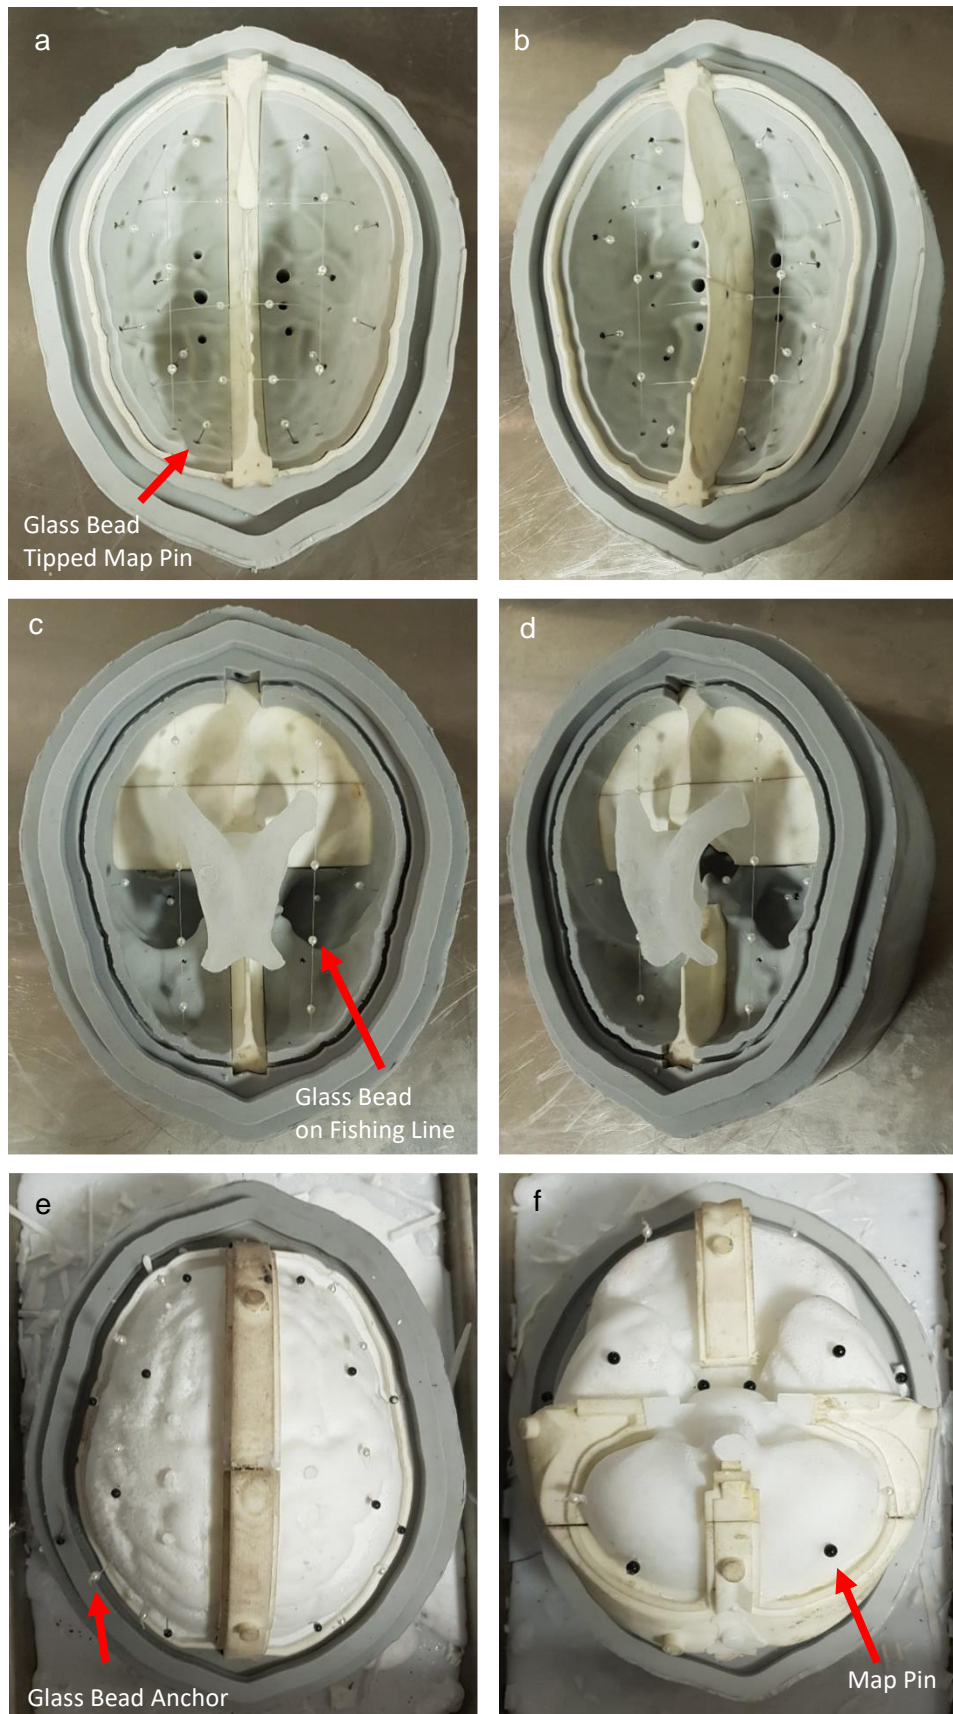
Map pin and fishing line maker positioning method. a) assembled upper mould half; b) alternate view of assembled upper mould half; c) assembled lower mould half; d) alternative view of assembled lower mould half; e) top half of demoulded brain (frozen) showing exposed heads of map pins and fishing line bead anchors; f) bottom half of demoulded brain showing exposed heads of map pins and fishing line bead anchors.
